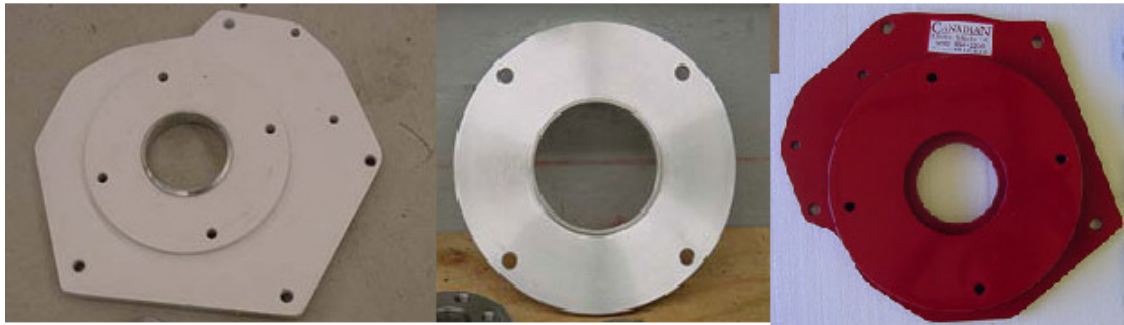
Different dimensions and patterns of adapter plate from motor mounting kits
